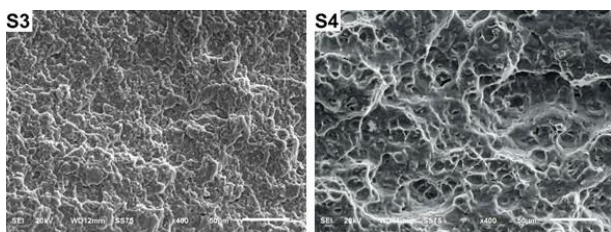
Fracture surface SEM images for weld S3 and S4 after tensile test
